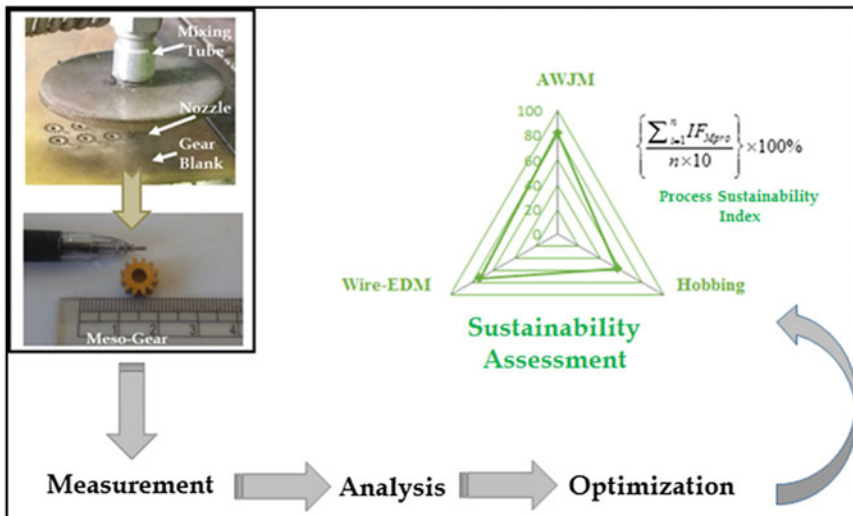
Sequence of tasks performed during manufacturing of miniature gears by AWJM
